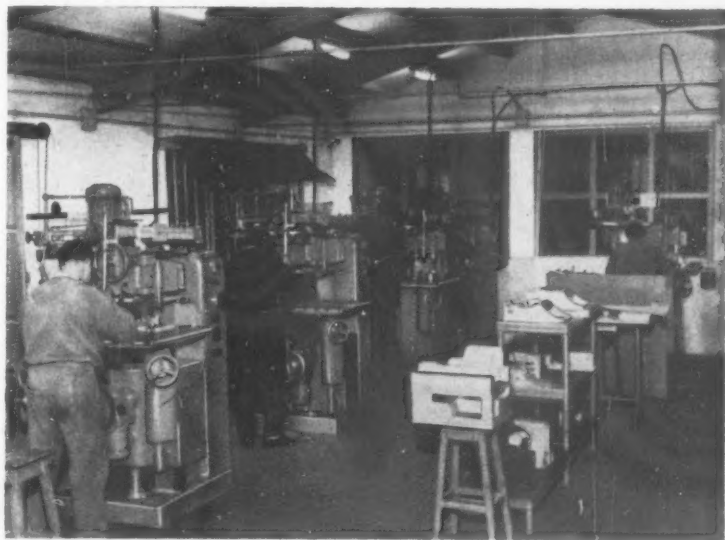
For Die-sinking and Similar Work a Battery of 12 Deckel Universal Pantograph Machines, some of which are Here Shown, is Installed in a Separate Shop of the Fonderpress Tool-making Department
